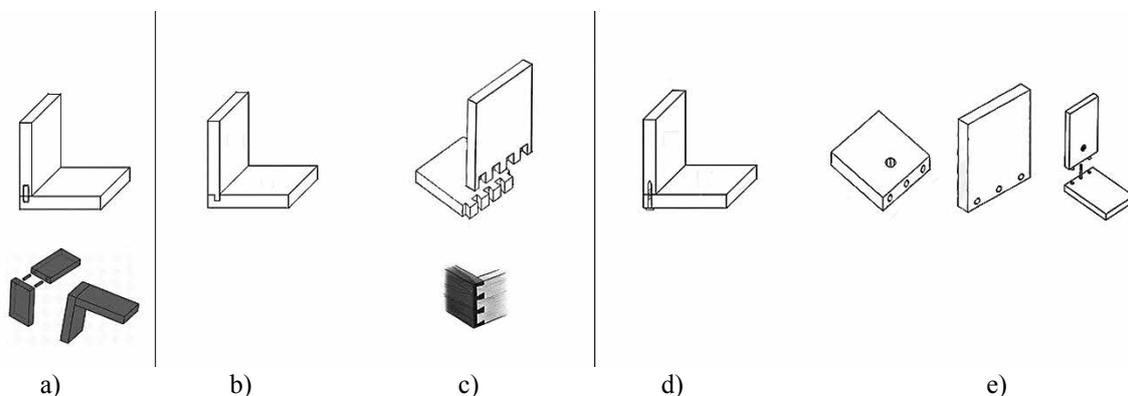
Test specimens: a) Wooden dowel jointed test specimen - DJ, b) Test specimen with tongue-and-groove joint - TGJ, c) Test specimen with half-blind dovetail joint - DTJ, d) Test specimen with screw joint - SJ, and e) Test specimen with eccentric (Minifix) joint - MJ
